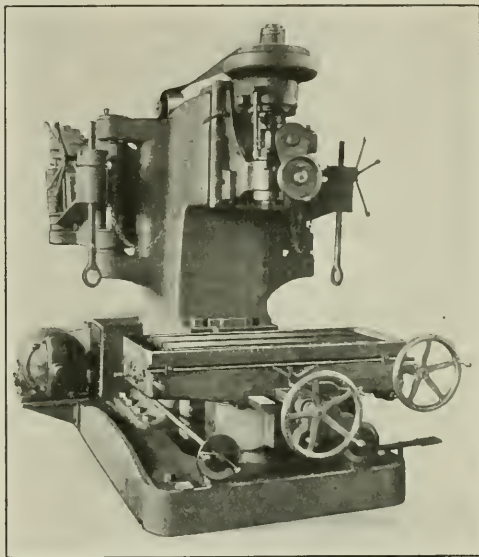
New Large-size Die-sinking Machine brought out by the Pratt & Whitney Co.
